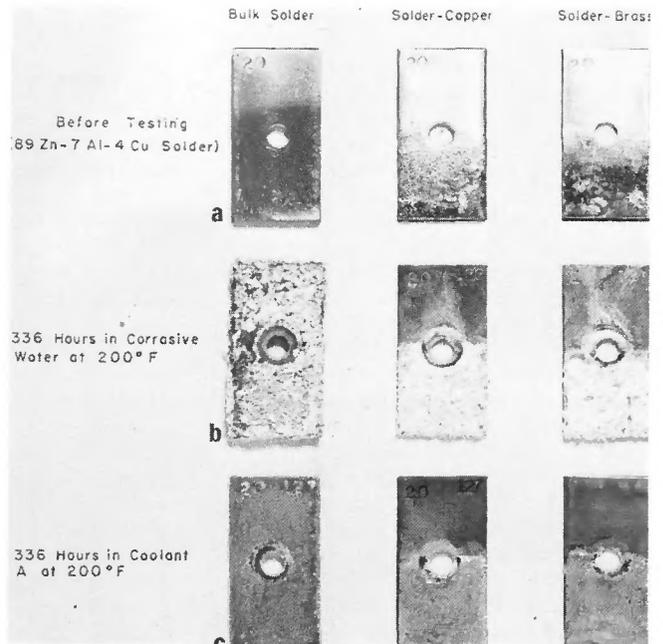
Test coupons: 89Zn-7Al-4Cu bulk solder and solder coated copper and brass before and after glassware corrosion tests
